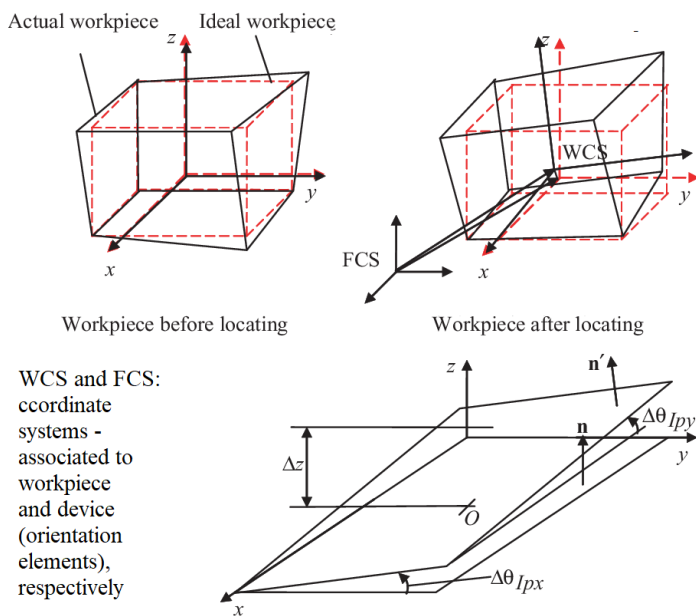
Workpiece and primary plane of workpiece surface deviation (before and after locating) [1]
